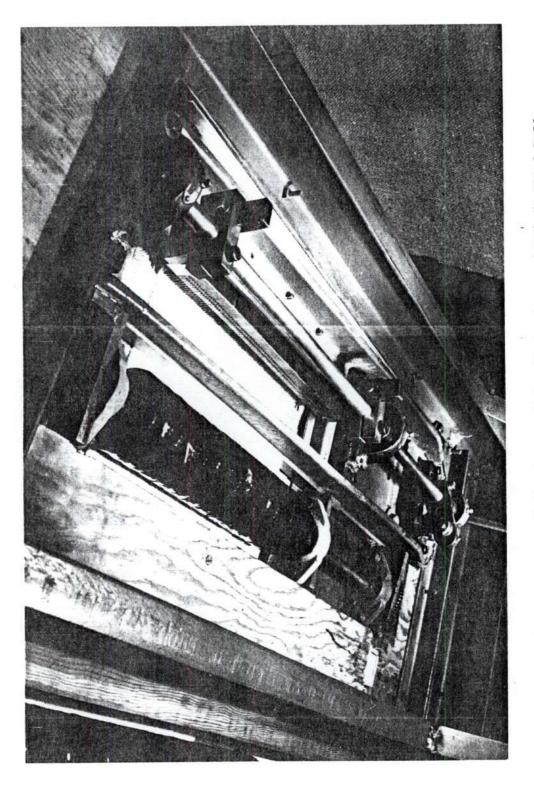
Looper Shaft, Looper Drive Mechanism, and Fabric Feed Roll.
